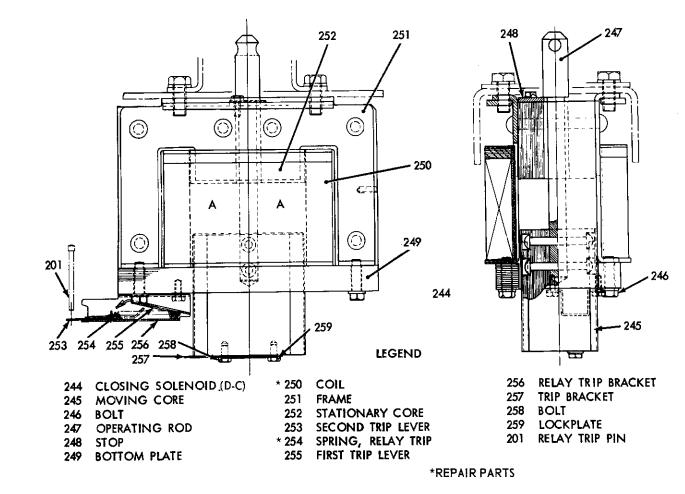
Closing Solenoid and Relay Trip Assembly— Electrically Closed Breakers
